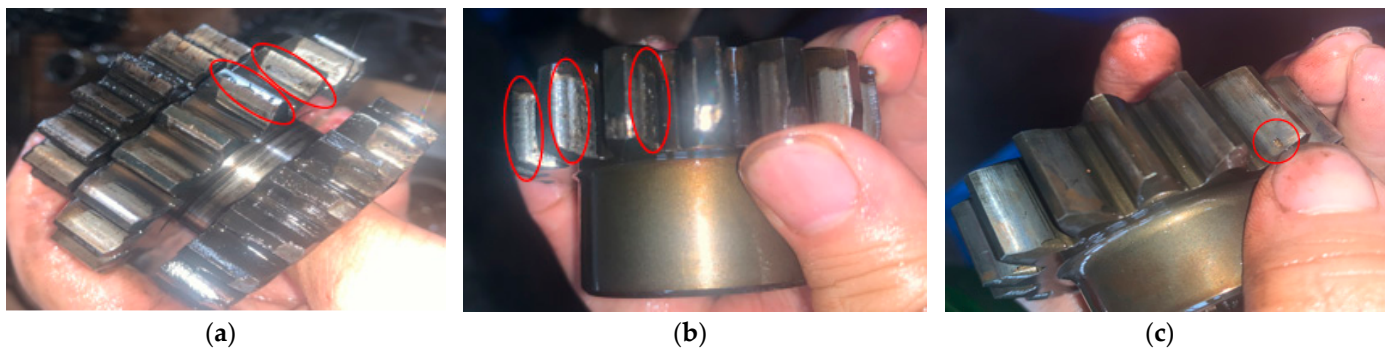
Damage of third-gear drive gear (a), third-gear driven gear (b) and power shunt gear (c) inside the gearbox.
